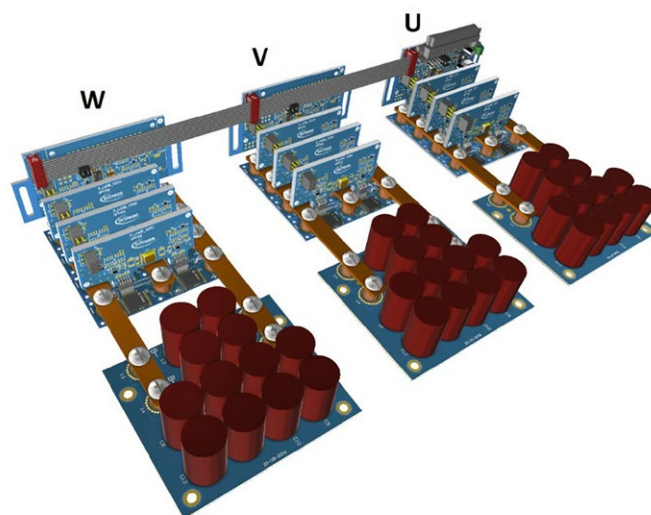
B6 motor drive implemented with the scalable power demonstration board
